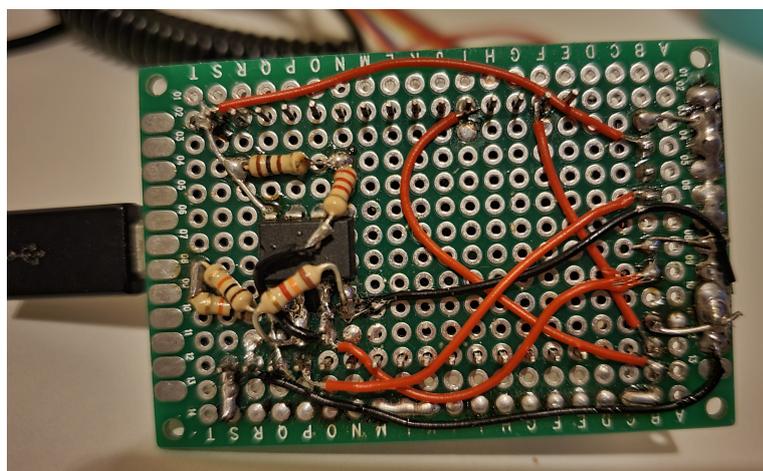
Bottom view of the soldering, wiring, operational amplifier (black component) and resistors, soldered on a perforated PCB
